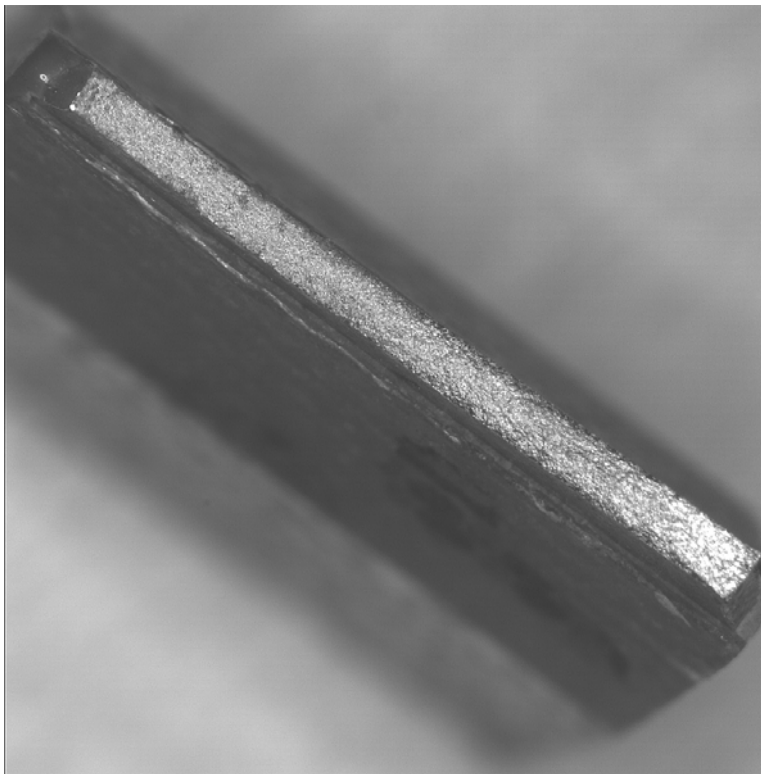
Fracture Surface of Specimen 5829.
